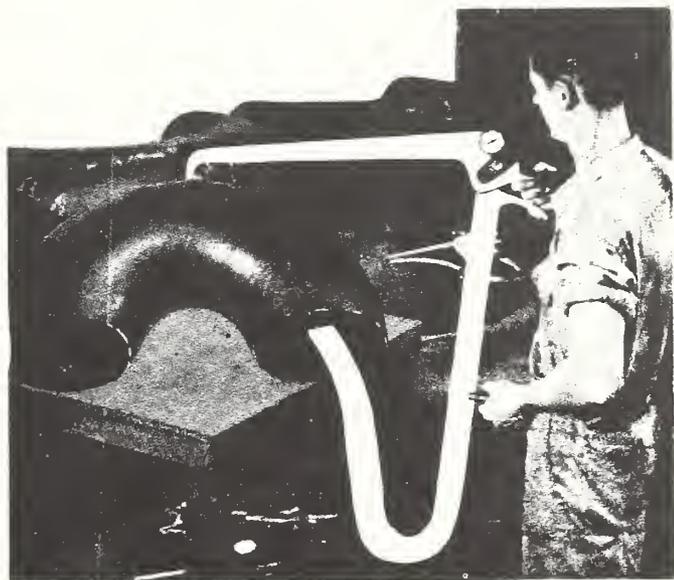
Combined joint caliper and dial gage to measure the wall thickness of elbow tubes.
